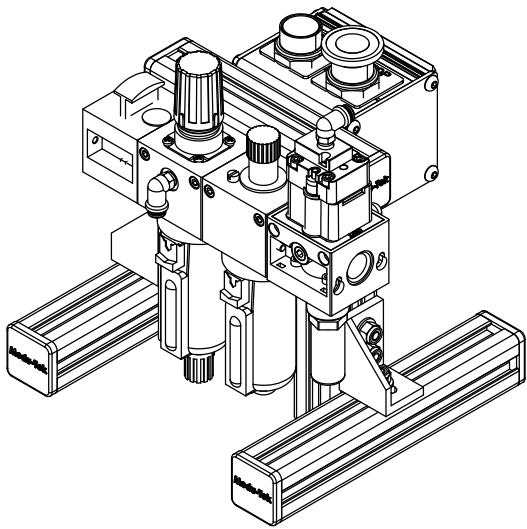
PNEUMATIC DRIVE ASSEMBLY (P/N 38716)
